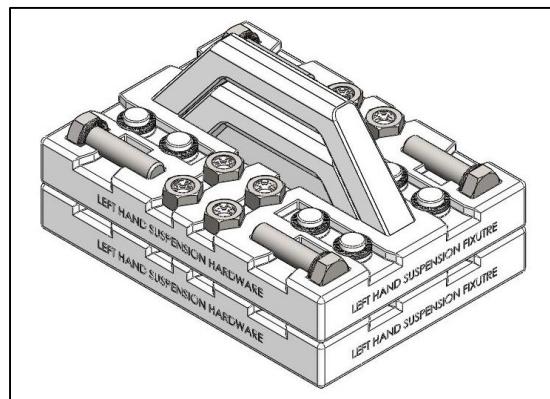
Fully assembled and stacked left-hand suspension fixture [57].
